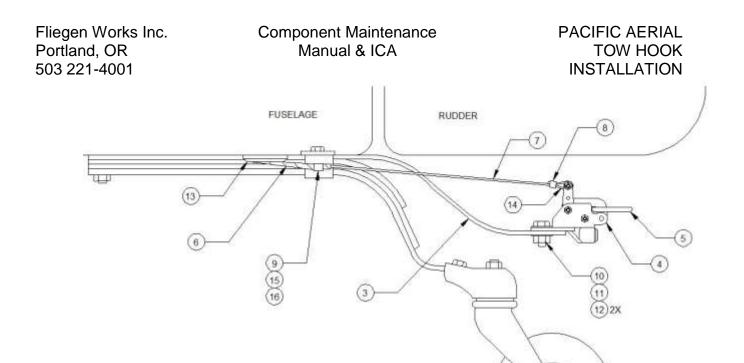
PATH Tow Hook Installation for Piper PA-18, ETC., Detail A
